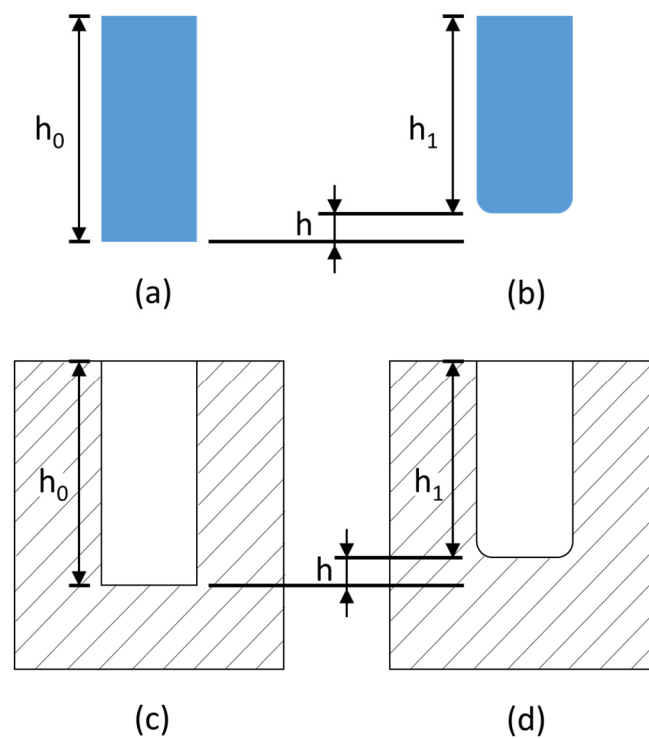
(a) Initial electrode design, (b) electrode shorter due to wear, (c) ideal workpiece cavity, (d) actual workpiece cavity due to electrode wear.
